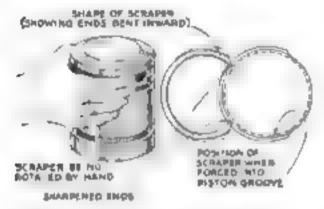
A curbon scraper fashioned from an old platon ring makes an ideal tool to remove the carbon from the ring grooves in the piston
